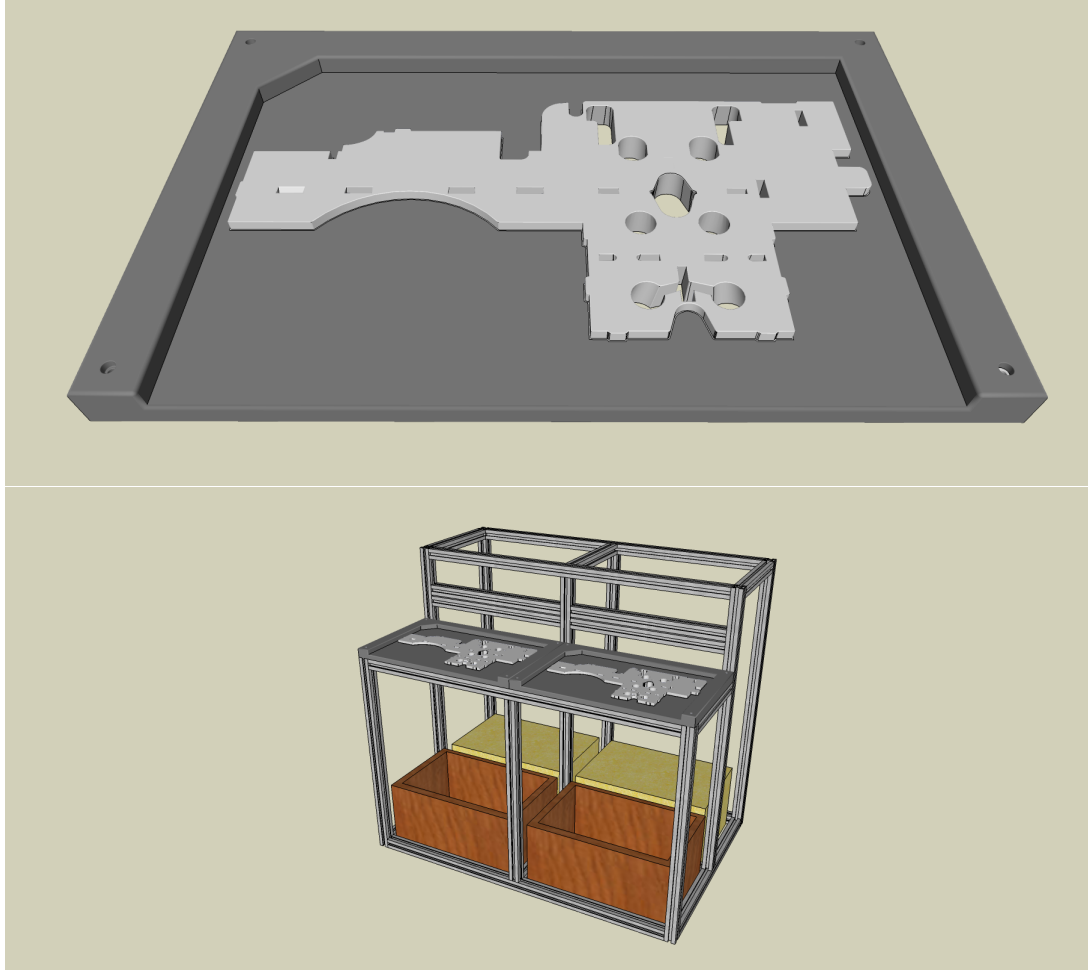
A combined solution to the waste material- and frame- removal steps called "Combined 2". From upper to lower picture; showing a focused image on the fixture and a image of two fixtures attached to a sheet-metal framework.
